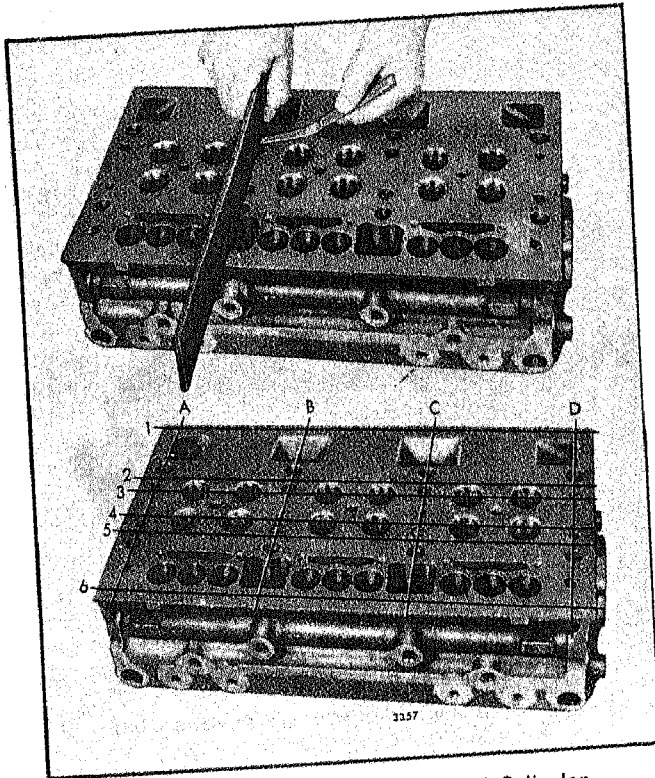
Checking Bottom Face of Cylinder Head for Warpage
